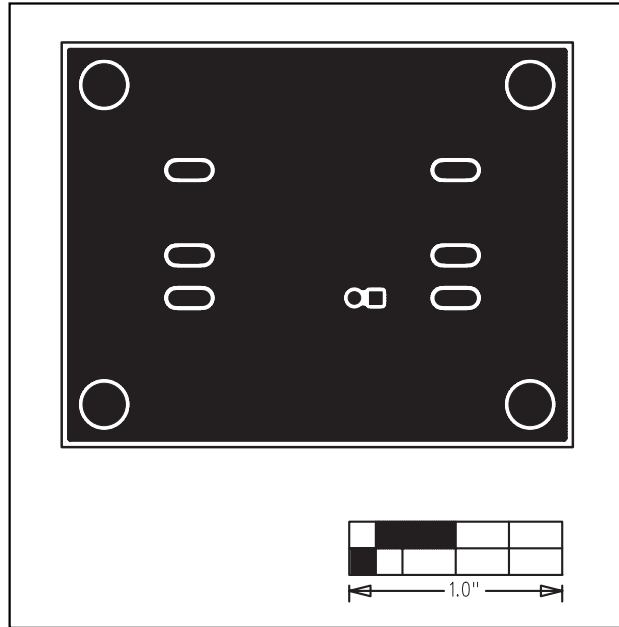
MAX3397E EV Kit PCB Layout—Solder Side
